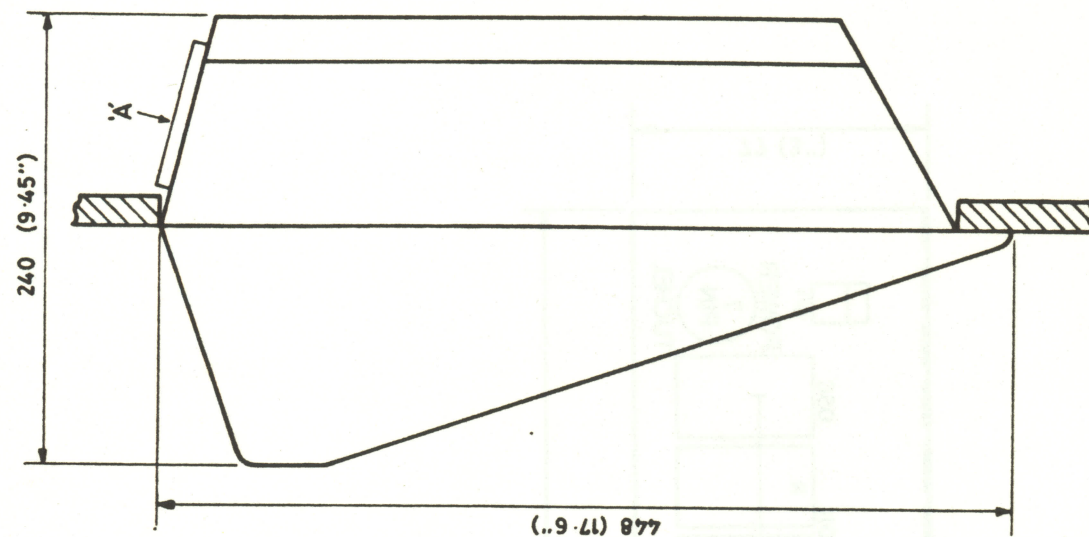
5422-R CONNECTOR PANEL ASSEMBLY
